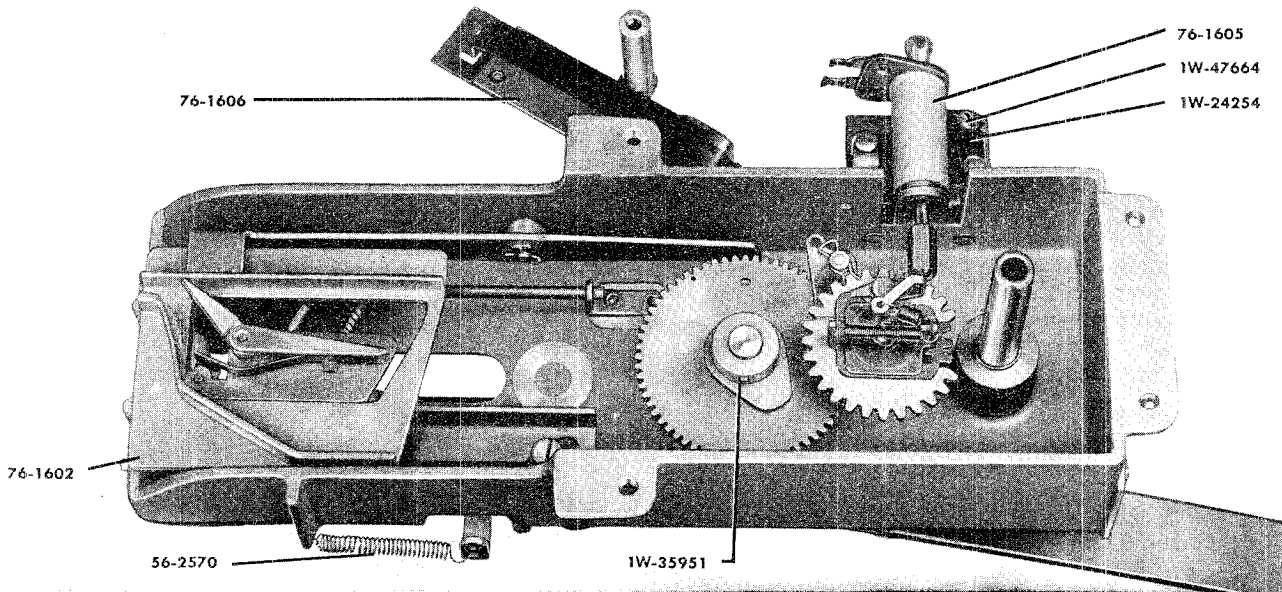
CHANGER MECHANISM ASSEMBLY, TOP VIEW.
